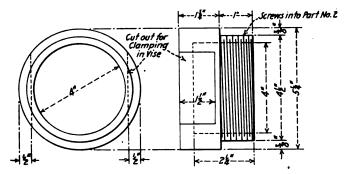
Sketch Showing the Holder As It Is Clamped in the Vise
